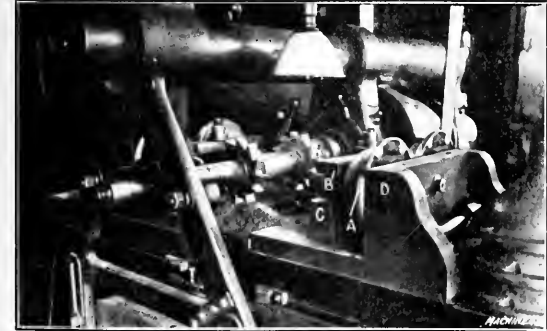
Reciprocal Milling Attachment for machining the Slot in Desk Fan Bases
